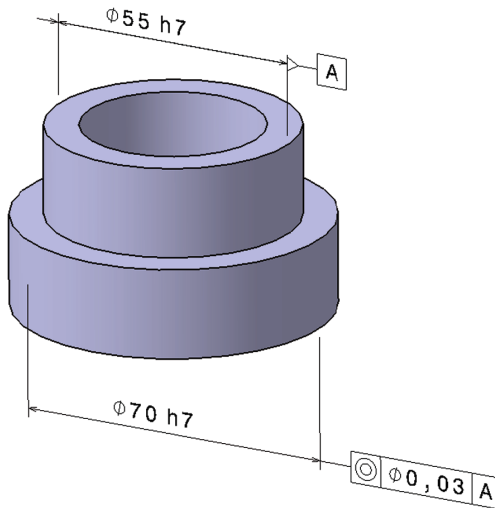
3D drawing indication of a coaxiality tolerance using a single datum Source: <https://e-uczelnia.ath.bielsko.pl/> [2–4]
